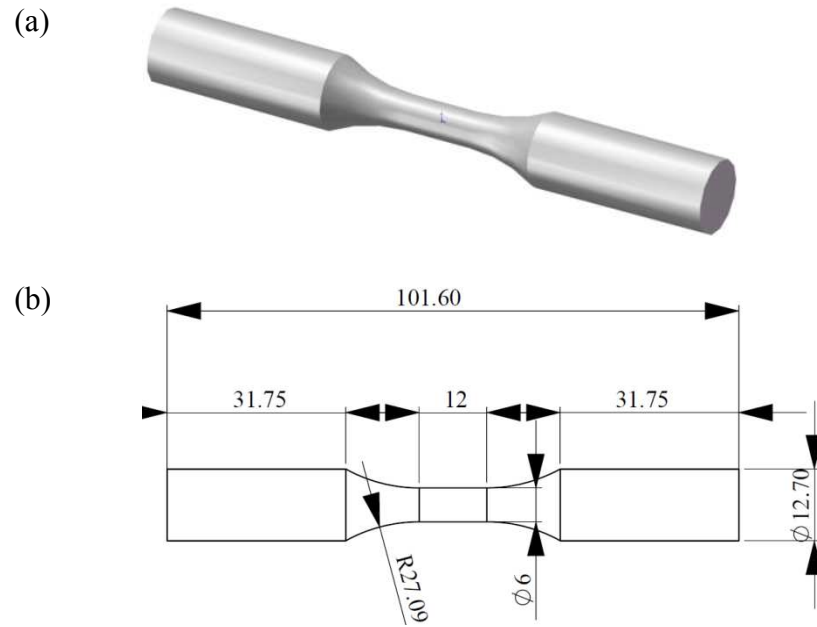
Fatigue specimen: (a) unnotched parent & welded metals specimen and (b) dimensions of unnotched specimen. (All dimension in mm).
